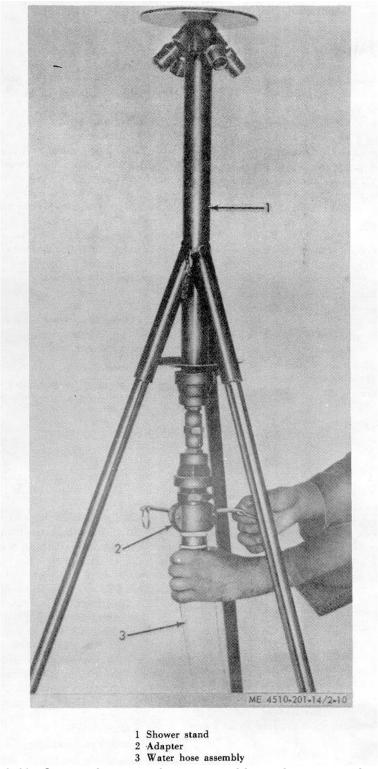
Connecting water hose assembly to shower stand adapter.
